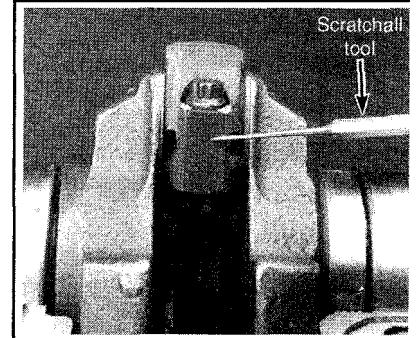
One method used to check bearing cap installation is to move a sharp pick or "scratchall" tool back and forth across the split line. When properly aligned and tightened, the tool will NOT catch
